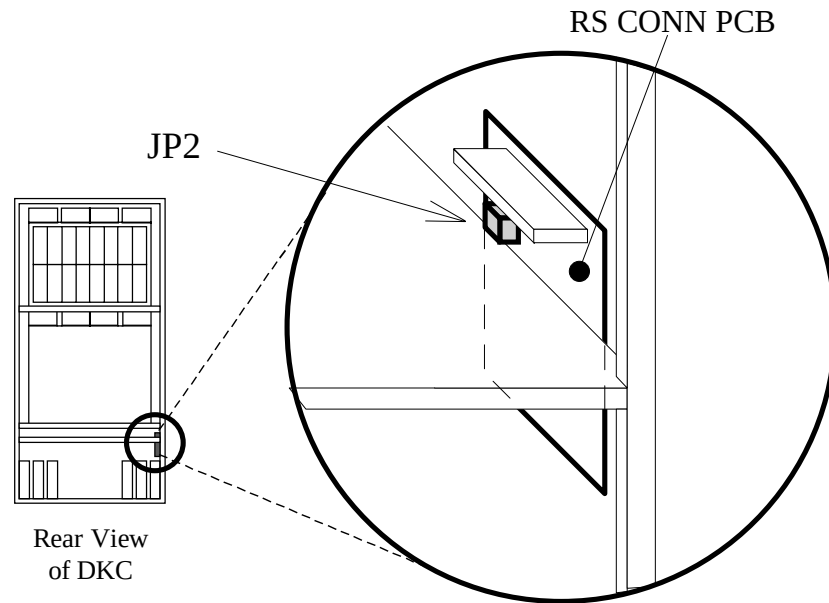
Installation of Jumper Plugs in RS CONN PCB
